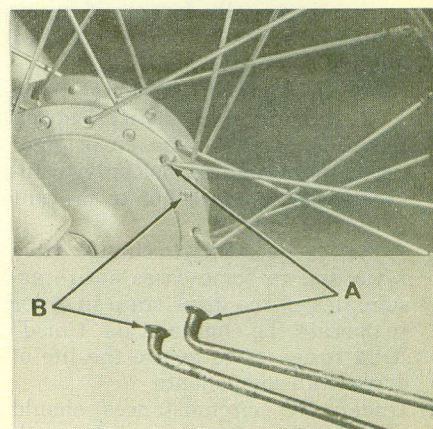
Inner spokes (B) and outer spokes (A) may have different radius bend at head.
